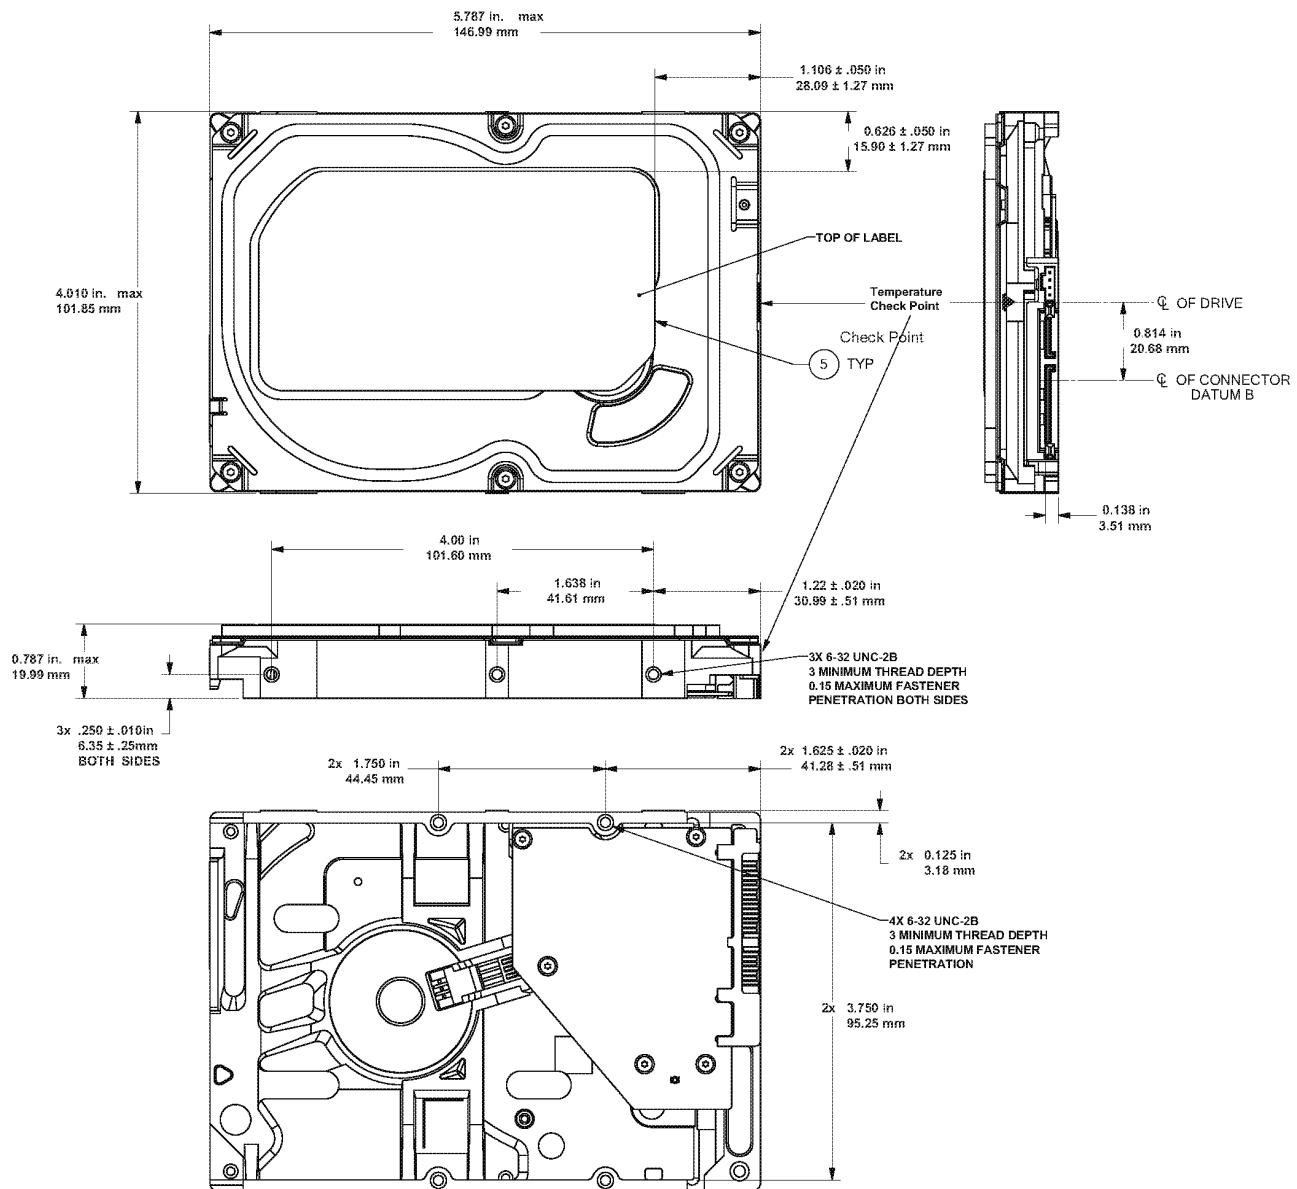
Mounting dimensions (3-disk: 1.5TB to 3TB models)
